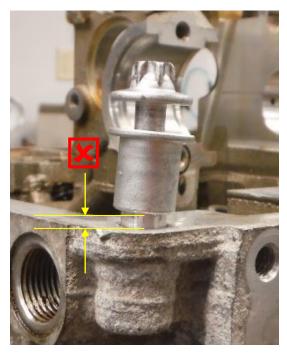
Female fastener sleeve could not accommodate male locating feature.
